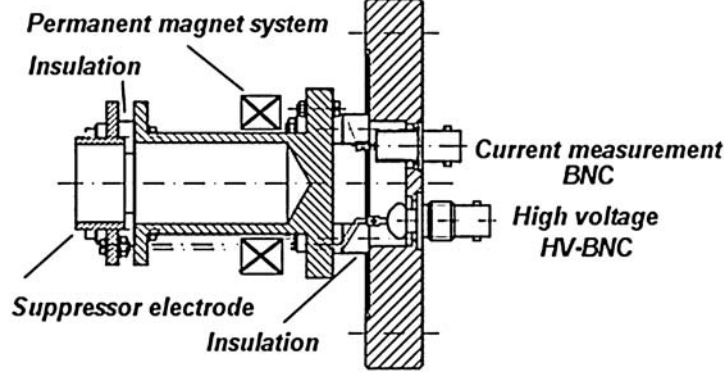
Construction drawing of a simple Farady cup without cooling, mounted on a CF flange [33]
